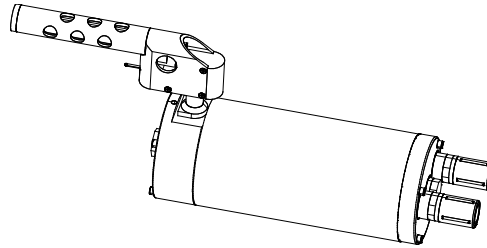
Whirligig Clamp-Mounted Maintenance Fixture: attaches to a workbench, and allows 360° rotation of the pressure hull.
